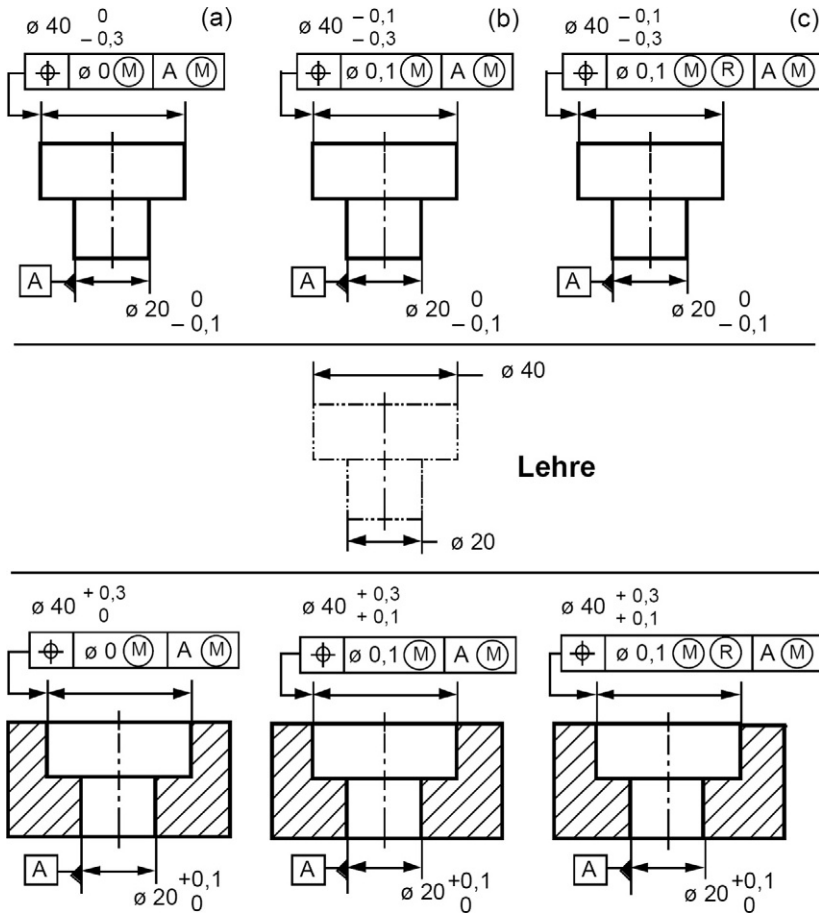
Maximum material requirement (M after the geometrical tolerance and after the datum letter) and reciprocity requirement (R after M (after the geometrical tolerance)
